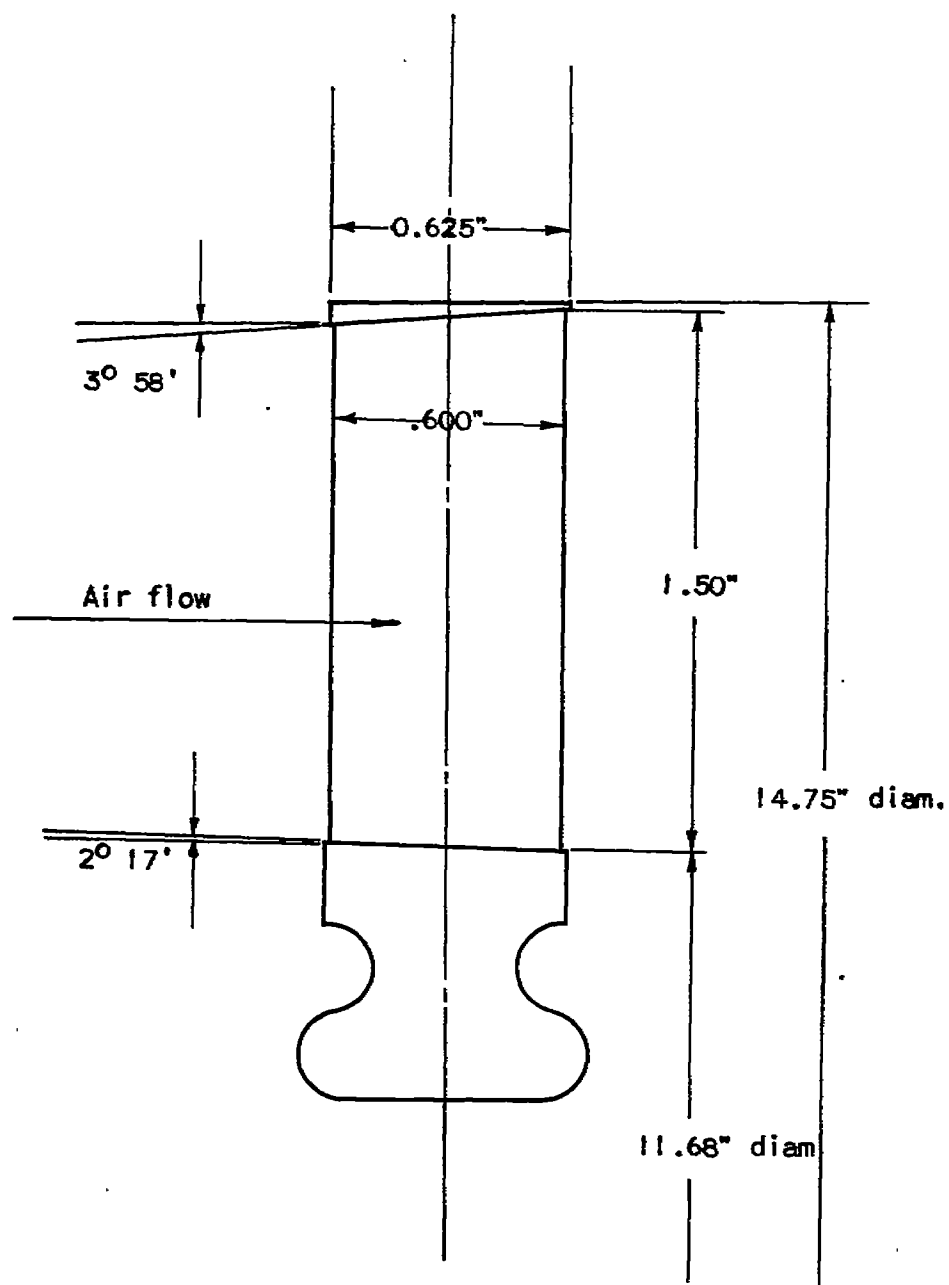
Sketch of rotor blade showing turbine dimensions.
